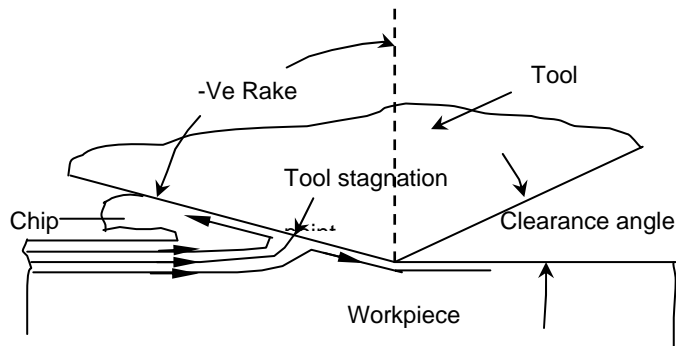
Mechanism of material removal in grinding with machining with high negative rake tools.
